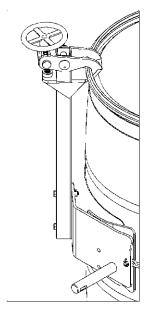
Plastic drum being lifted with part number 4560-P Top Rim Clamp Assembly installed.
